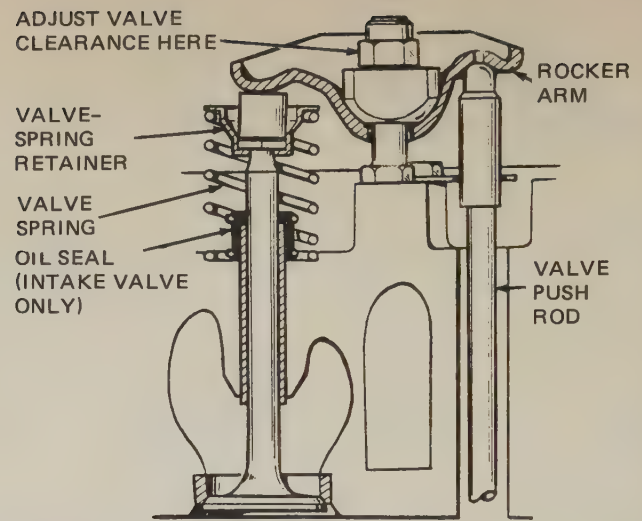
Adjusting valve-tappet clearance on an engine with rocker arms independently mounted on ball studs. Backing the stud nut out increases clearance. (Onan Corporation)
